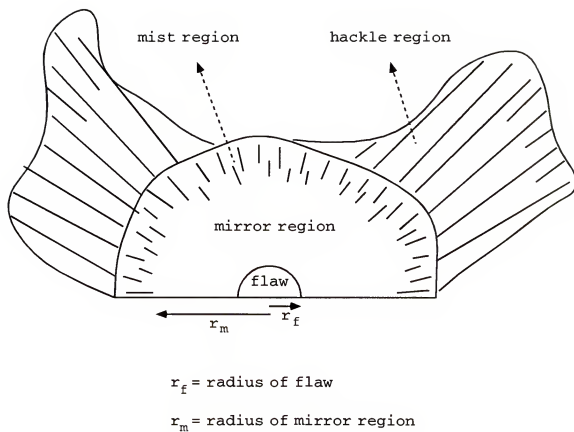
Schematic Morphology of a Typical Fracture Cross-section of Brittle Materials
